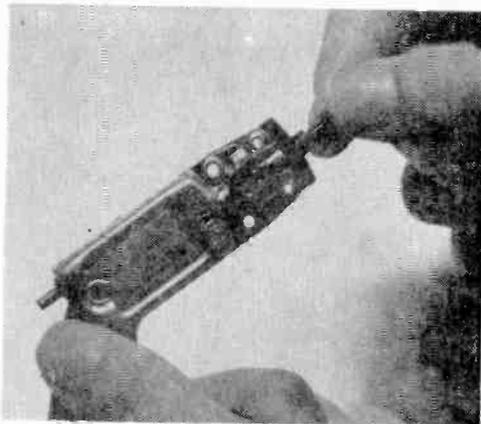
Old turnover type crystal cartridge mounts and pivots on front shaft; it's removed by taking turnover knob off.
